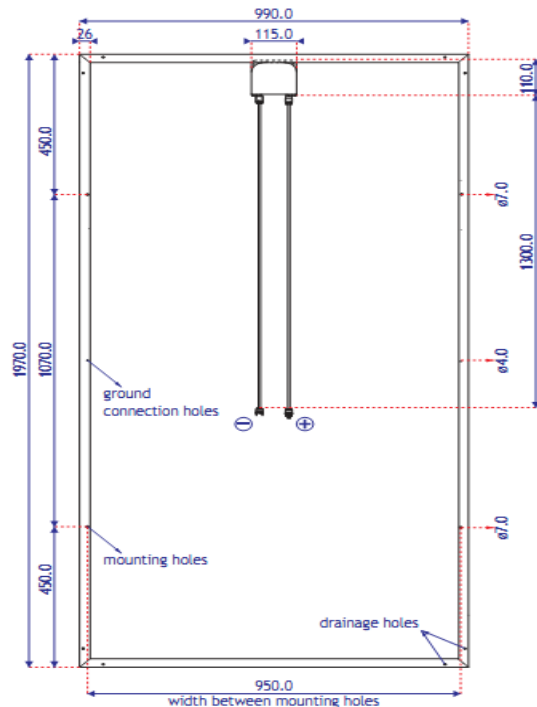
Mechanical drawing of an SLG module showing the mounting holes, the drainage holes, and the ground connection holes
